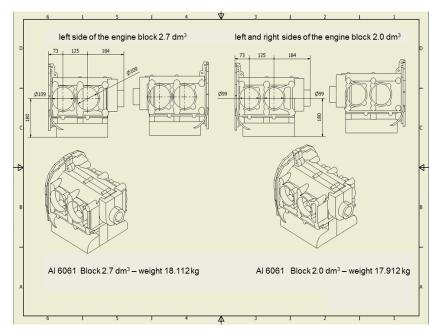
Engine Subaru Flat4 – simplified assembly drawing
